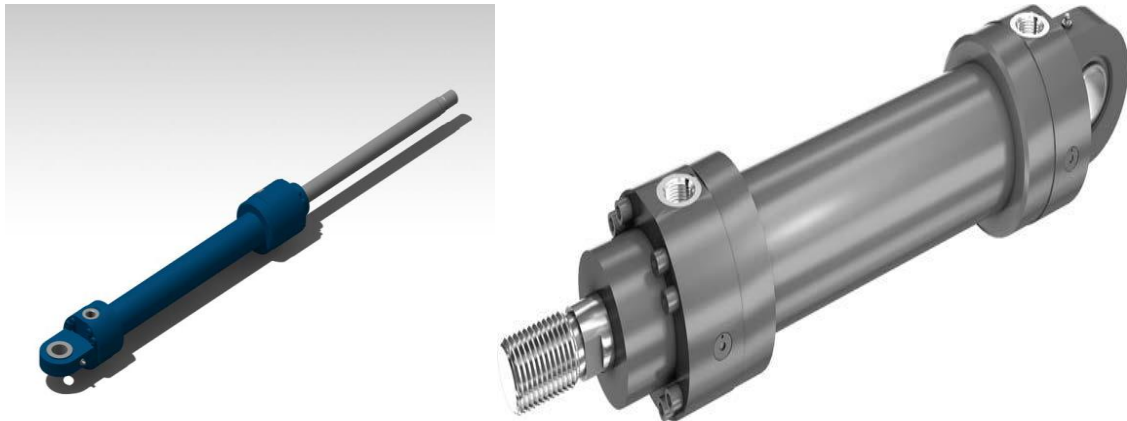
Bosch Rexroth Hydraulic Cylinders
